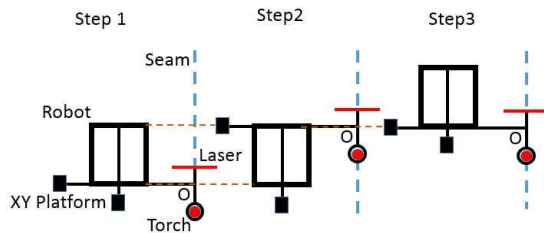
Diagram of Welding Process of Wall Climbing Robot
